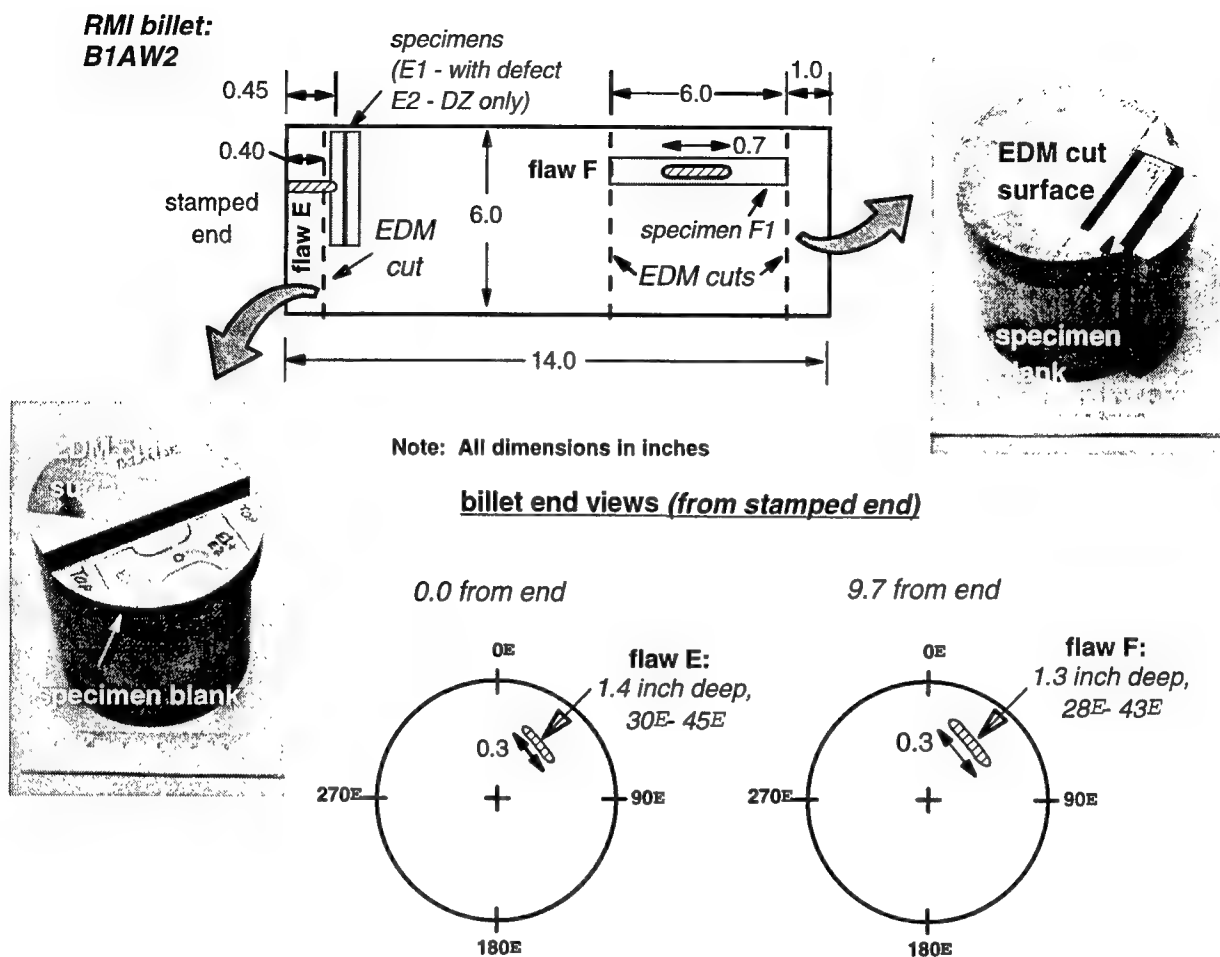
PHOTOGRAPH OF THE BLANKS REMOVED FROM THE RMI BILLET B1AW2E (Specimens RMI-E1, -E2, and -F1.)
